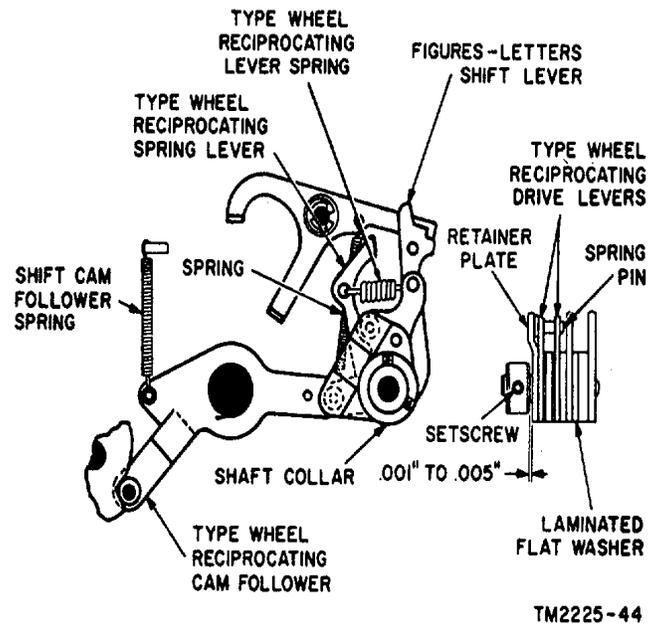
Type wheel reciprocating levers clearance adjustment.
